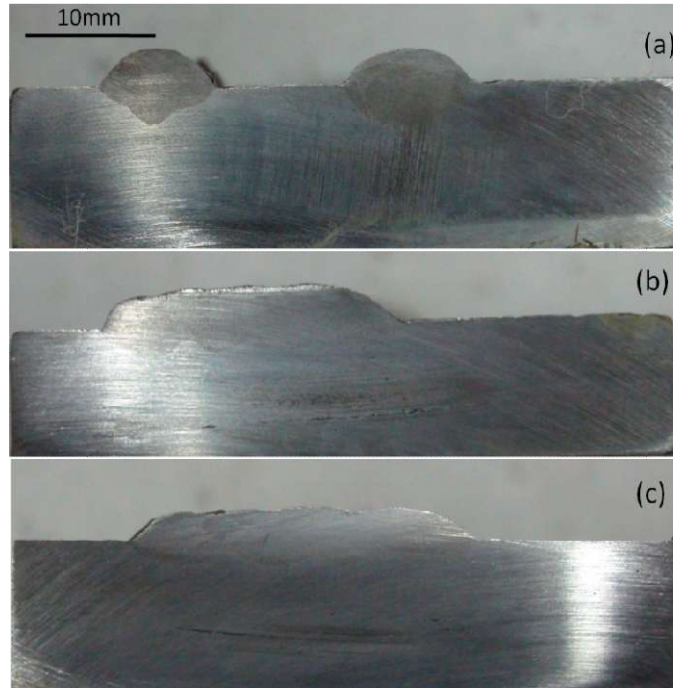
The cross section of single weld bead and overlapping beads. (a) single weld bead; (b) four beads overlapping of normal deposition; (c) four beads overlapping of magnetic field assisted deposition.
